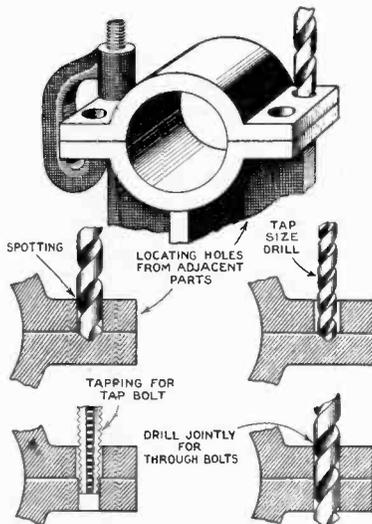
Eliminate guesswork in fastening adjacent parts and obtain cleaner and more accurate, finished work.
